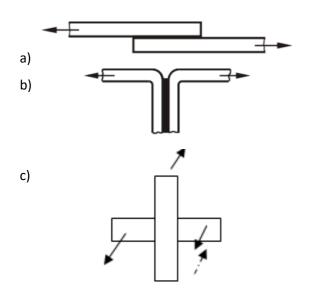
Methods for testing the adhesive joint: a) TS test; b) L test; c) CT test
